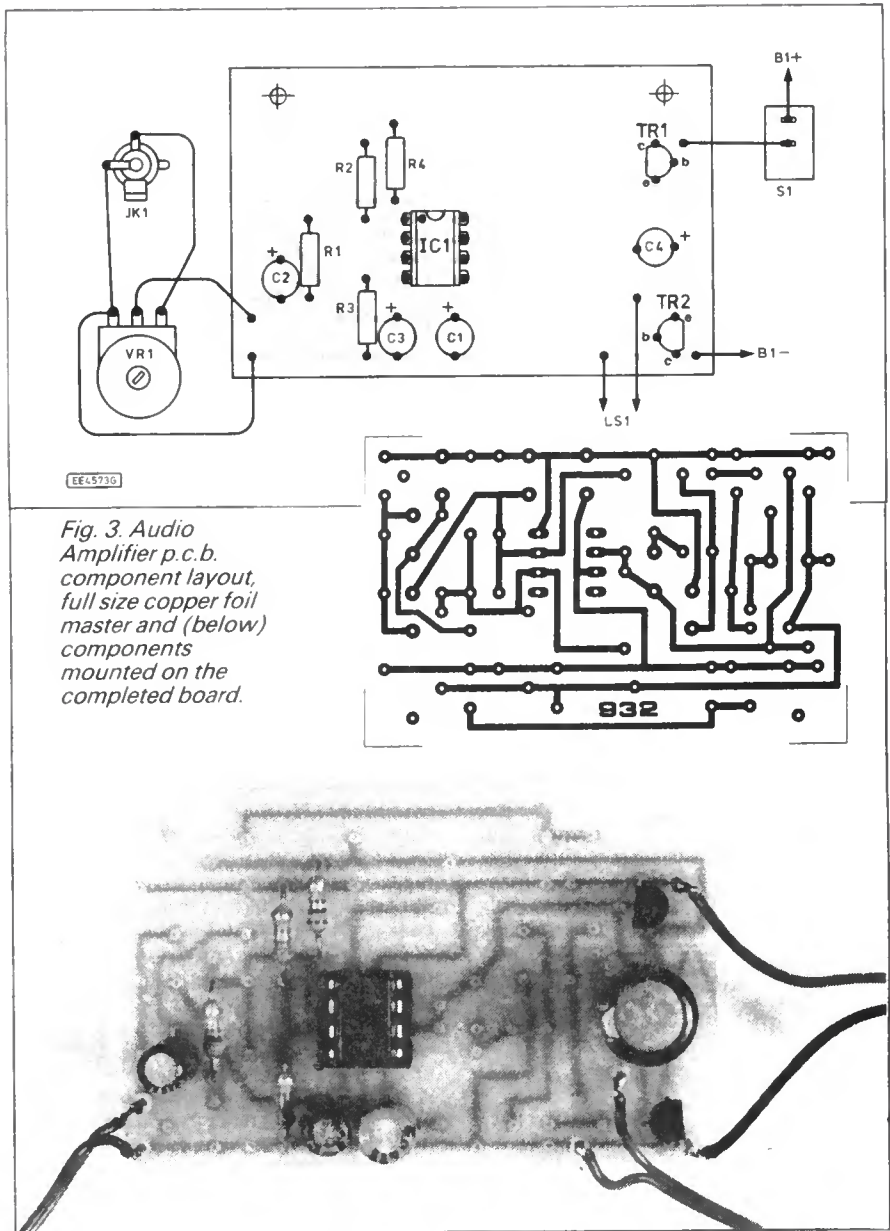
Audio Amplifier p.c.b. component layout, full size copper foil master and (below) components mounted on the completed board.
